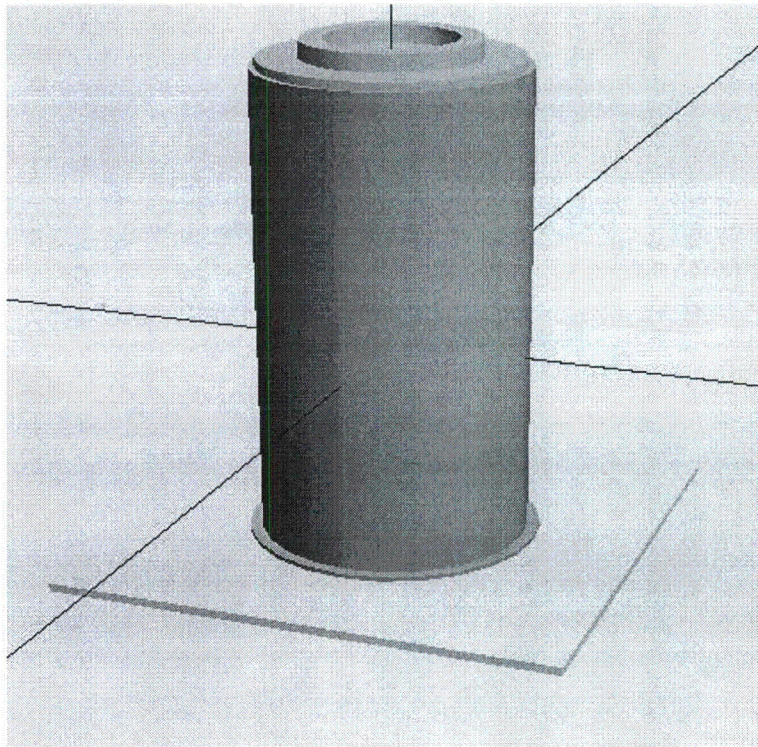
VIEW OF ASSEMBLED HI-STORM ON PAD-MPC
